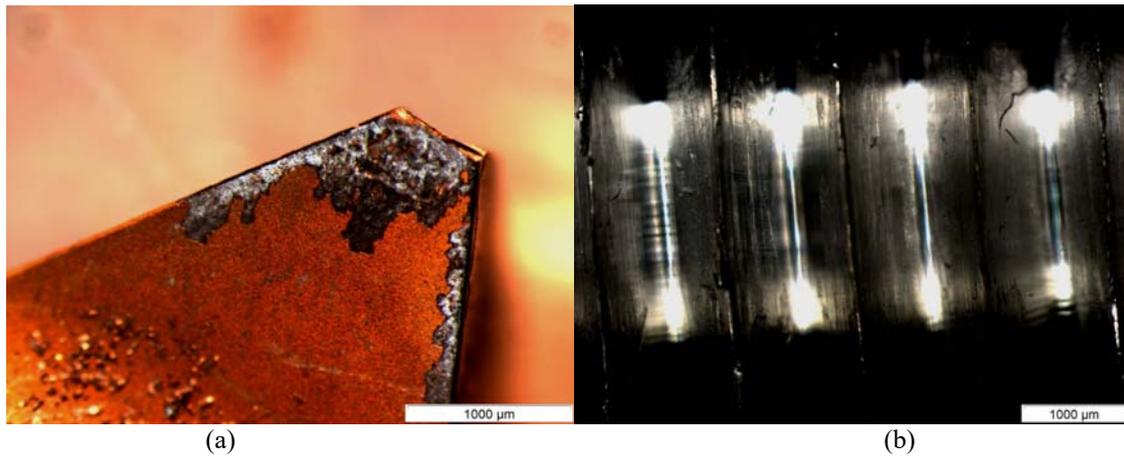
Radial infeed results (a), worn tool, (b) thread surface finish.
